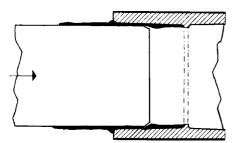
Assembly of Surfaces While They Are Wet and Soft
